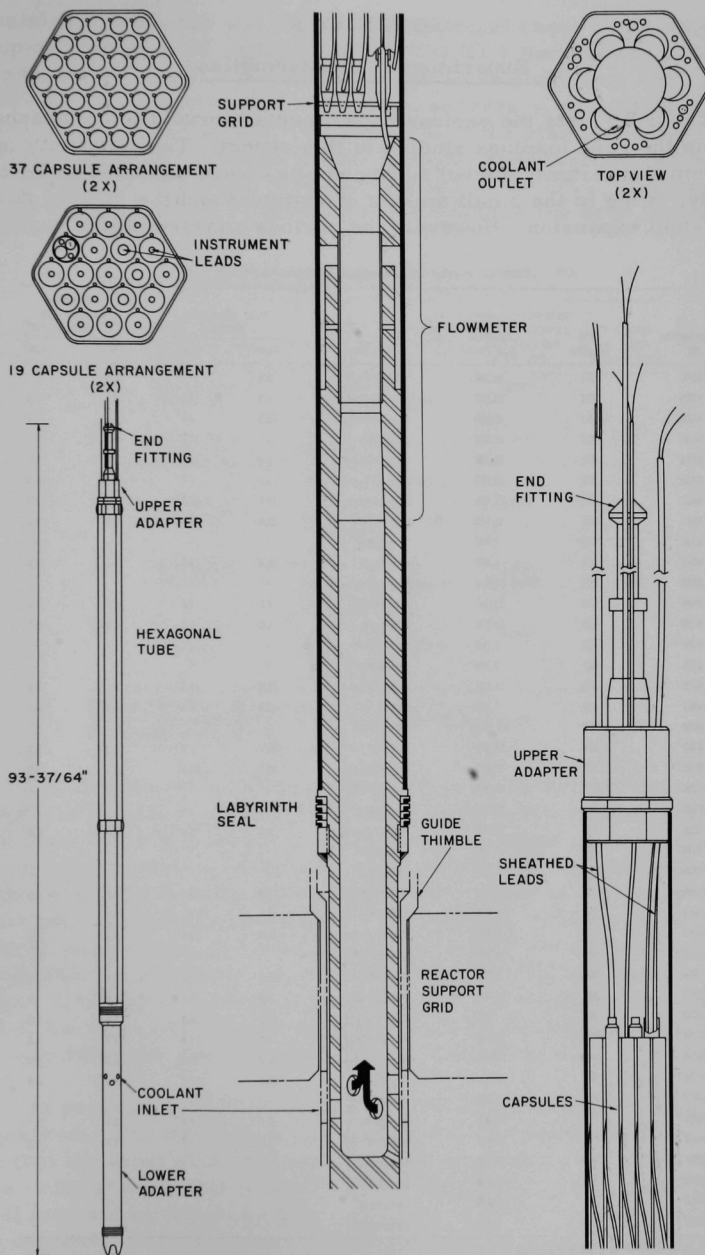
Instrumented Subassembly. ANL Neg. No. 113-2409.
